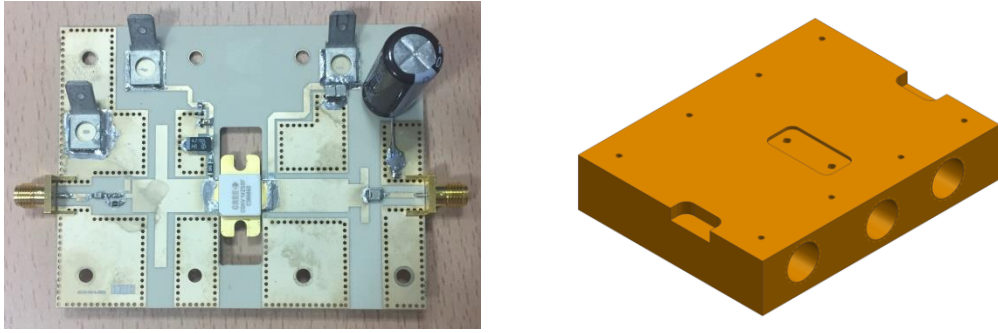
Top view of the prototyped PA v3 (left), 3D view of the designed copper base plate (right).
